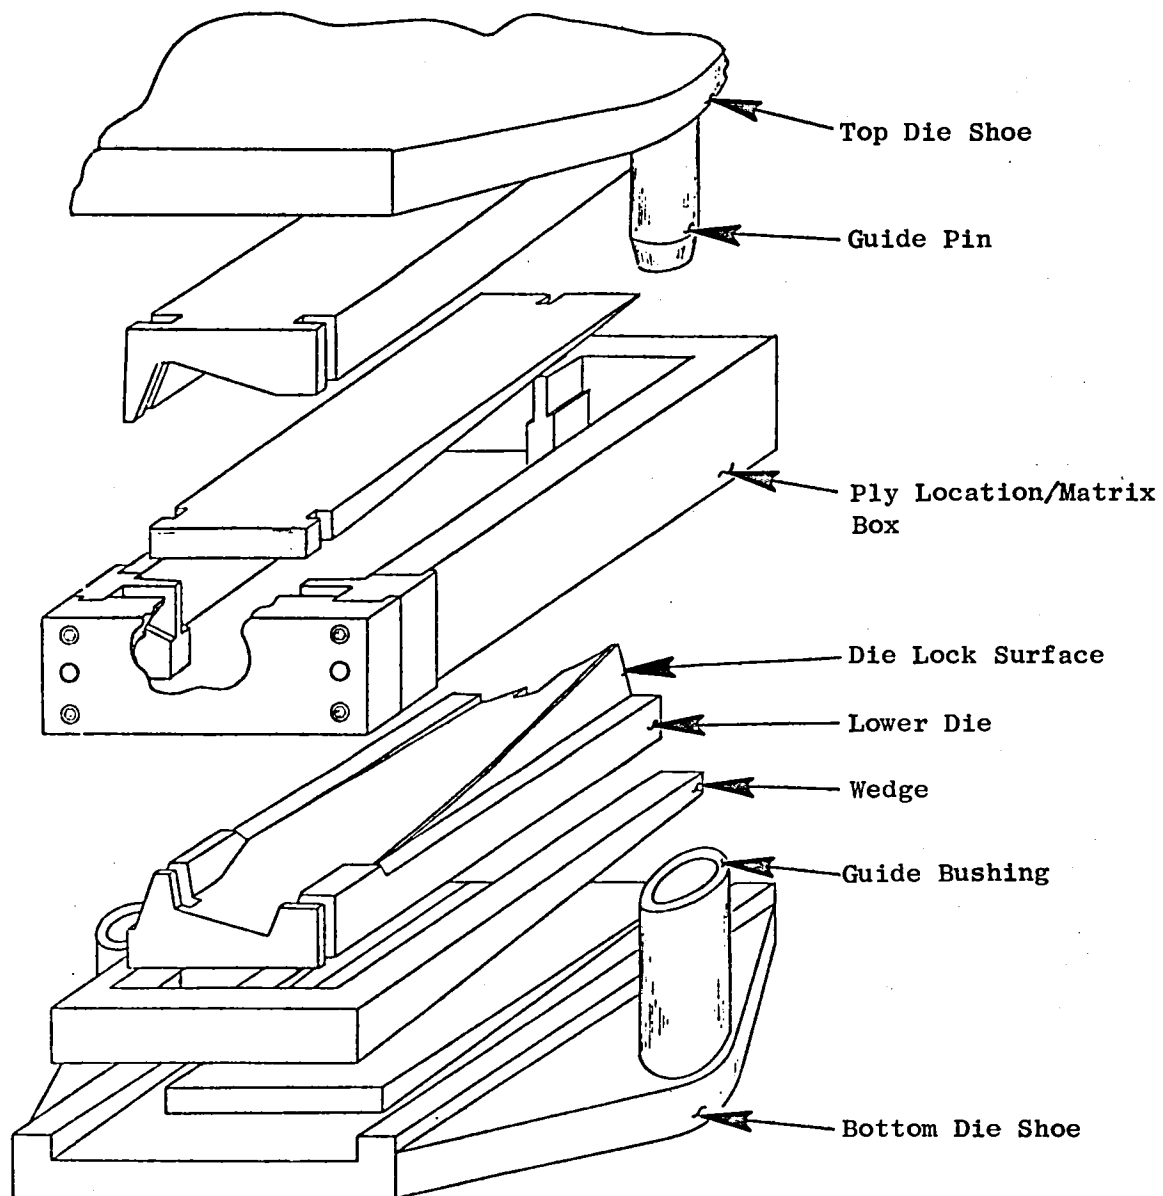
J79 Stage 1 Compressor B/A1 Blade Pressing Die.
